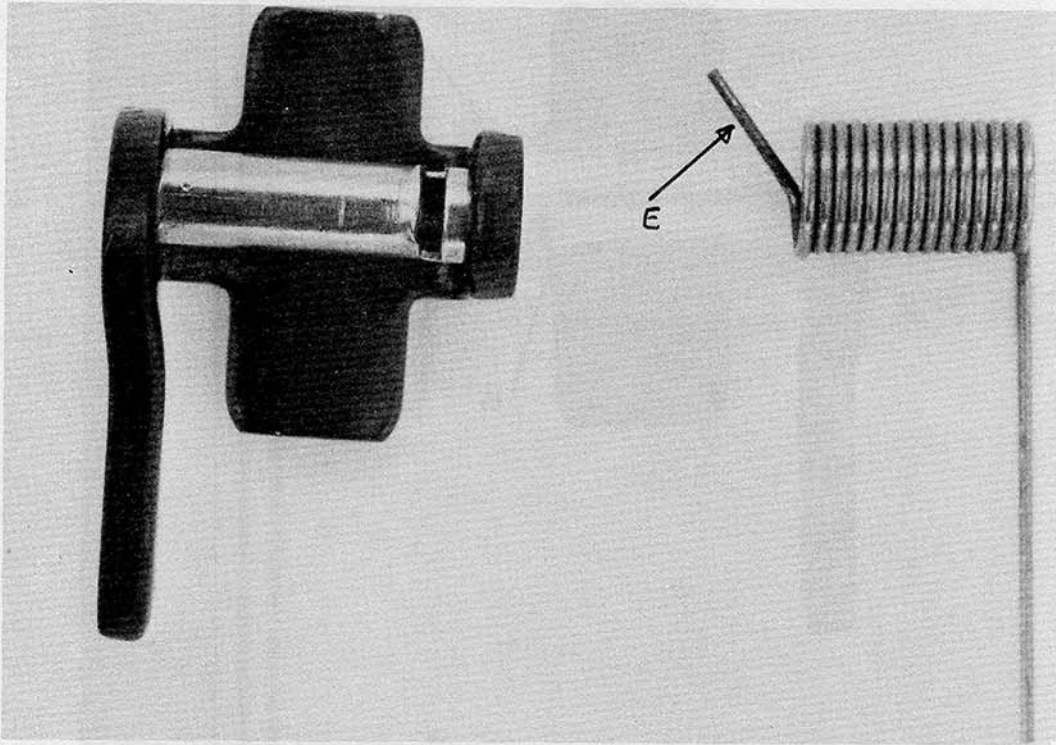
Test rifle automatic sear assembly partially disassembled.
